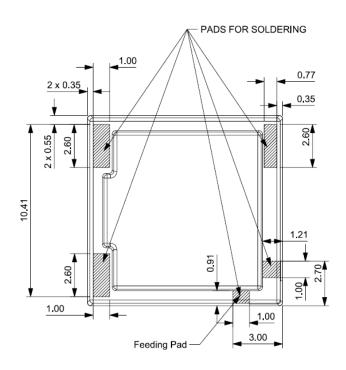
PADS OF PRODUCT FOR SOLDERING
